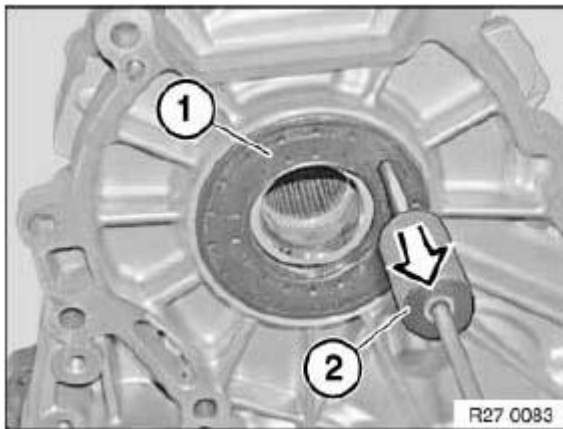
Identifying Radial Shaft Seal And Impact Weight
